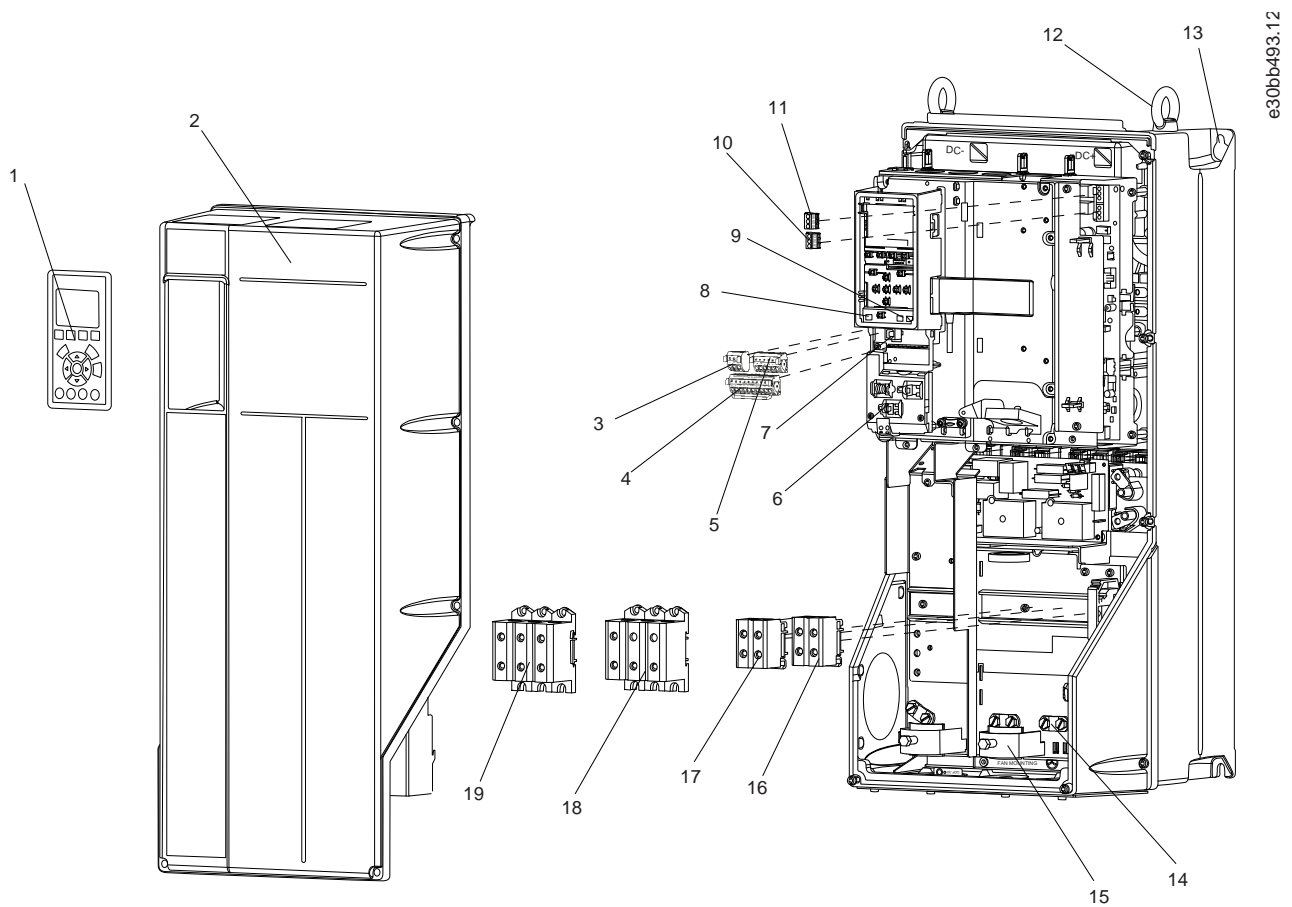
Exploded View Enclosure Types B and C, IP55 and IP66
